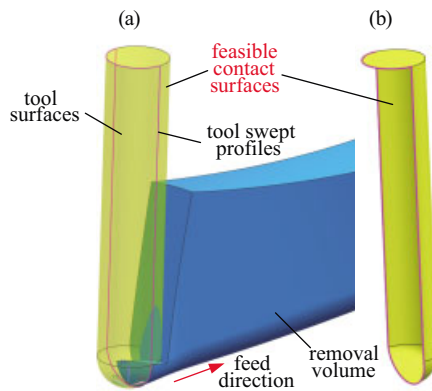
Illustration of feasible contact surfaces: a) tool surfaces contacting with the RV; b) feasible contact surfaces at specific cutter location. For a color version of this figure, see www.iste.co.uk/zhang/milling.zip
